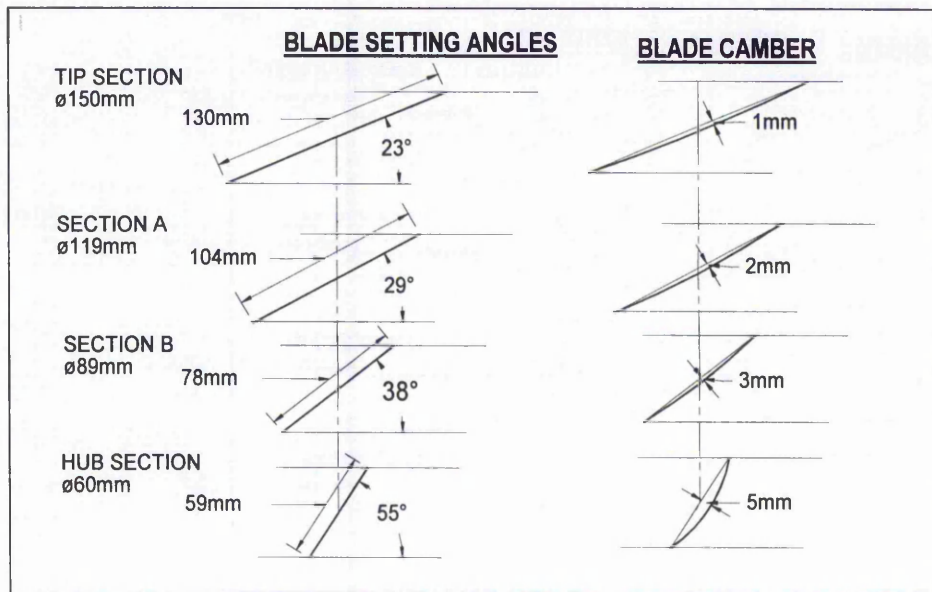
Details of blade setting angles and blade camber for the prototype runner.
